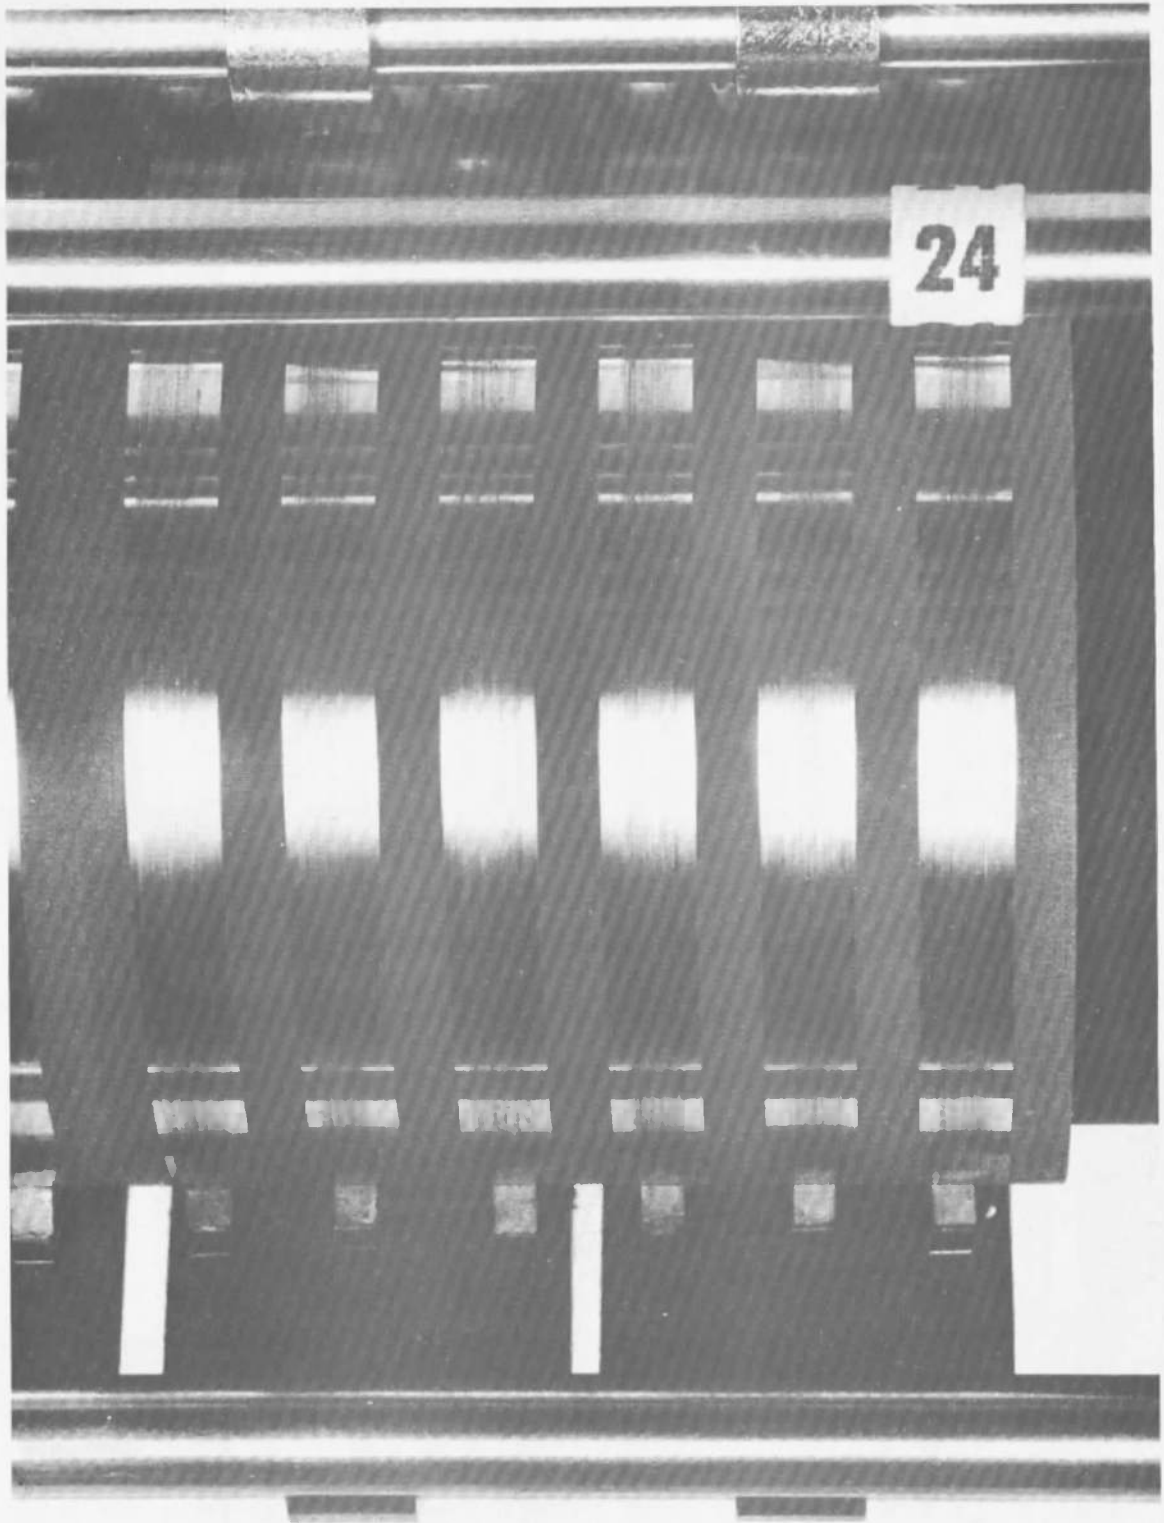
Detail at Ring 19 Through 24 of Assembly 3 After Testing
